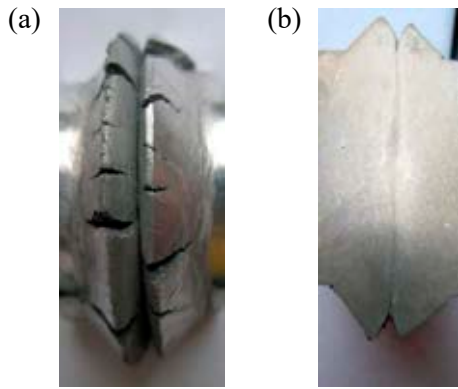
View of a welded joint with a continuous drive AISi9/21%SiC(p)-AlSi9/21%SiC(p): (a) view of the welded joint and (b) cross-section (Wysocki, Grabian & Przetakiewicz, 2007)
